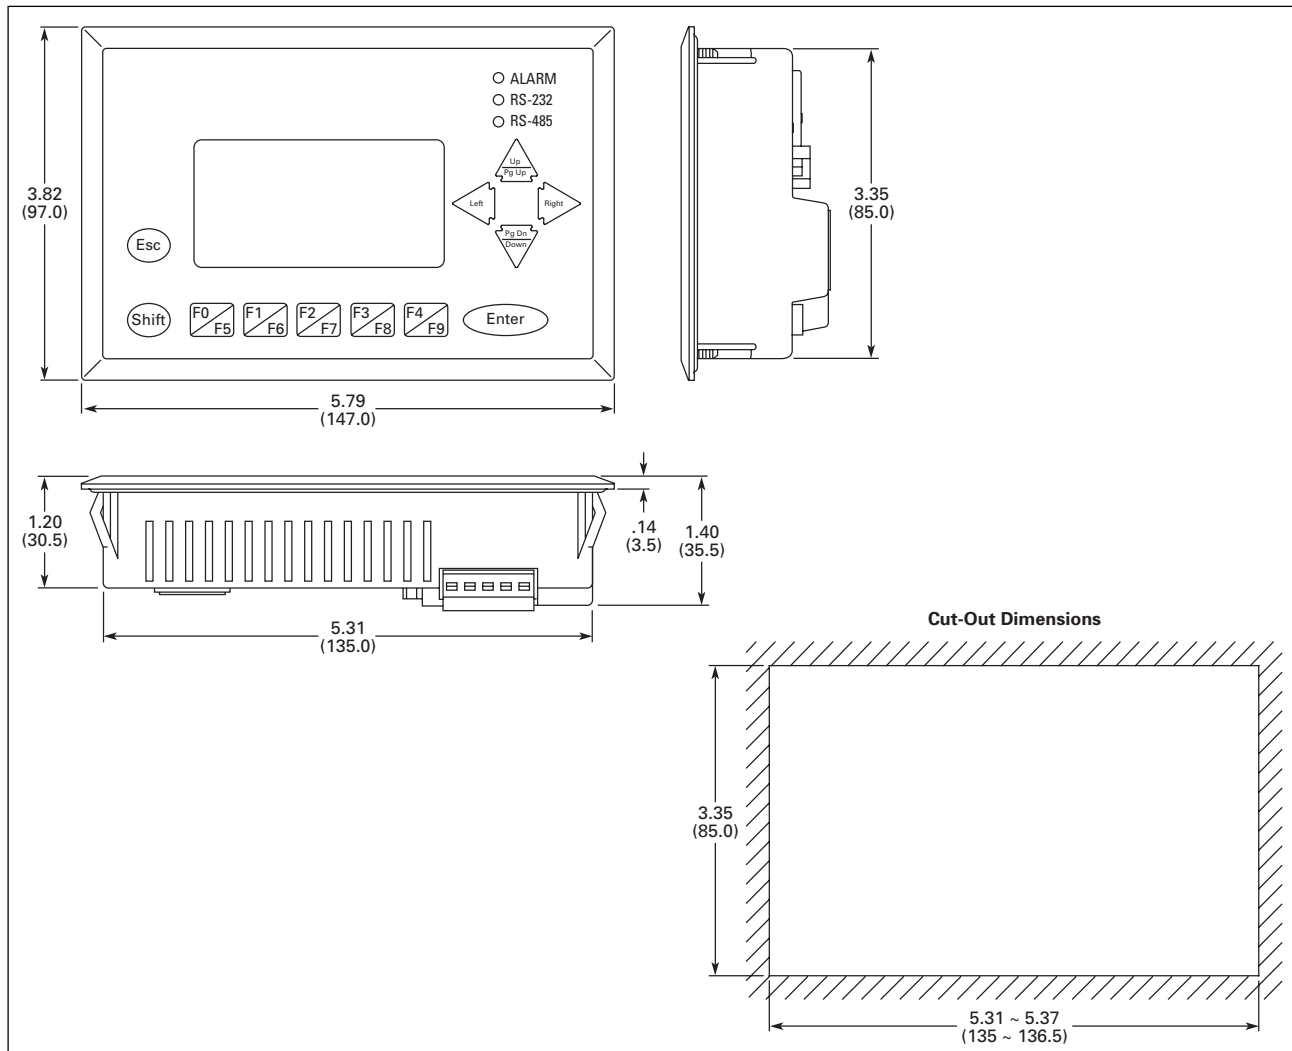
ECL-GP04 — Approximate Dimensions in Inches (mm)
